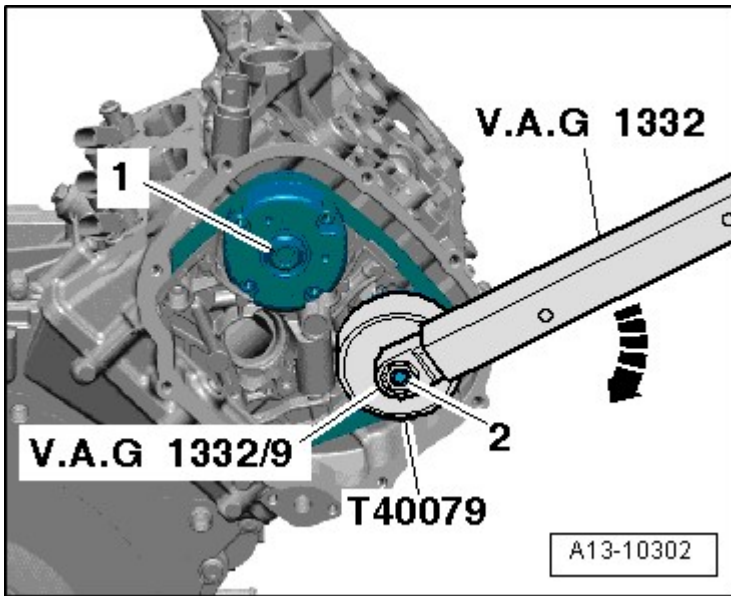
Positioning Adapter T40079 On Exhaust Camshaft Adjuster At Right Cylinder Head
